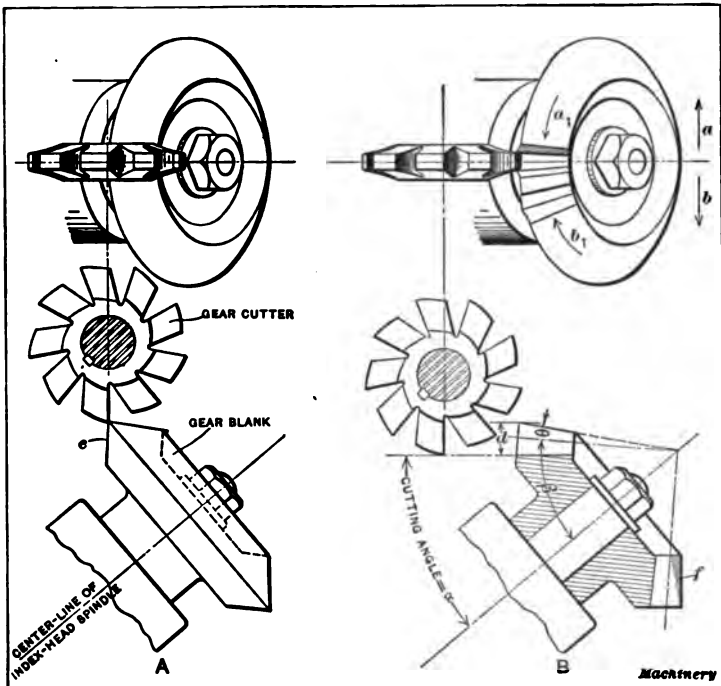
Diagrams showing Relative Positions of Cutter and Bevel Gear Blank
